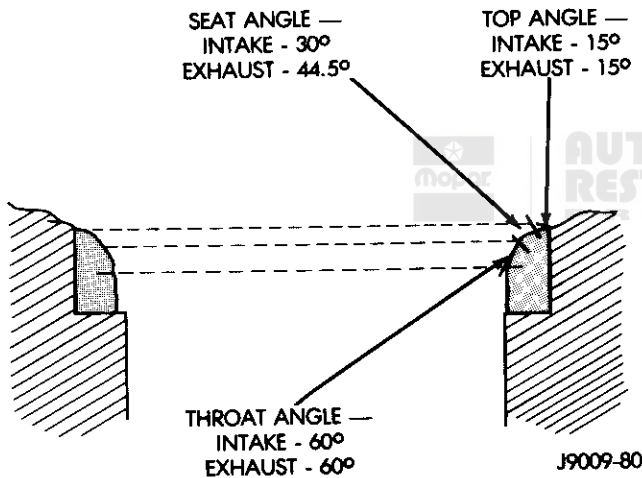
Intake and Exhaust Valve Seat Dimensions
